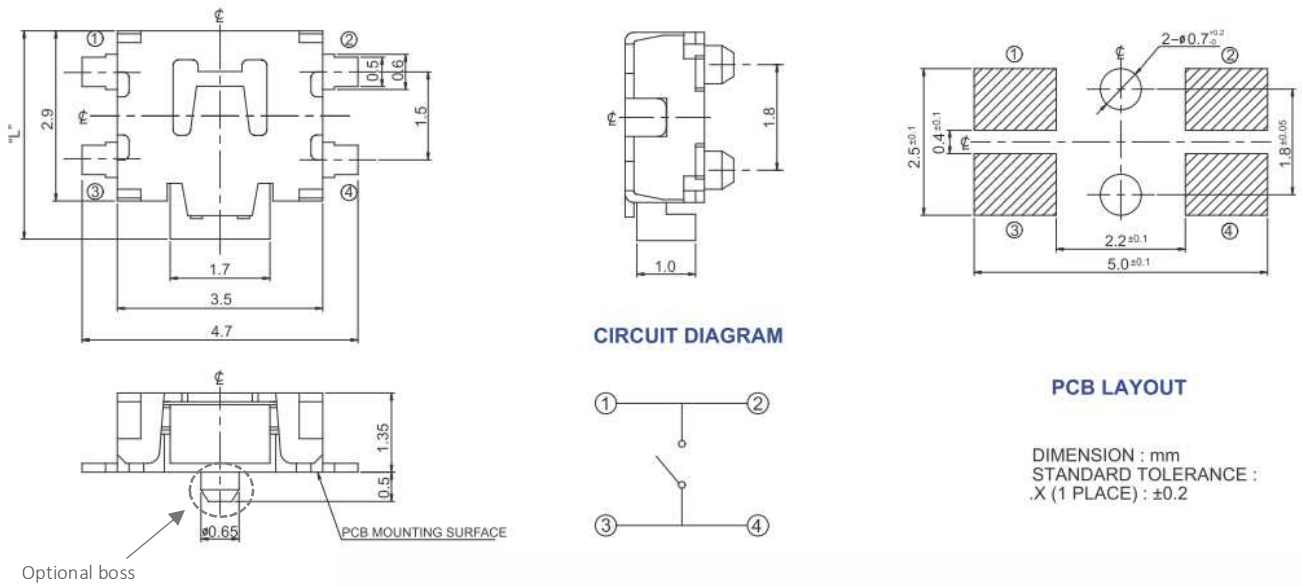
226EM2..., Surface Mount Gull Wing Type 2, No Ground Terminal
